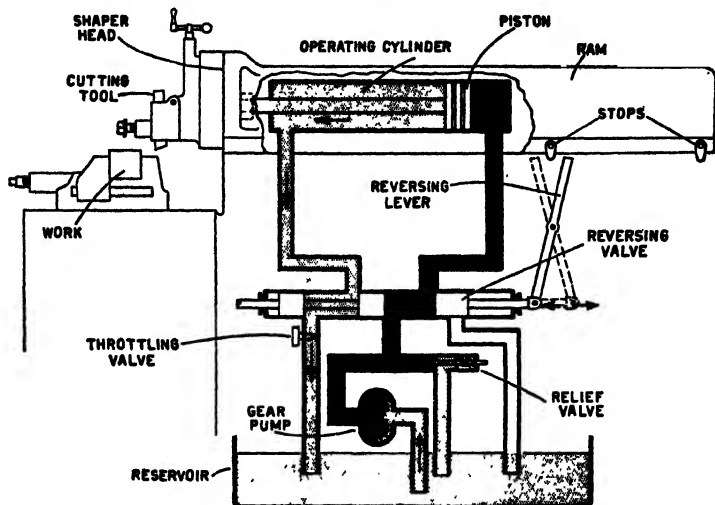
Principal parts of a constant-volume hydraulic circuit of a shaper. (The Socony-Vacuum Oil Company)
